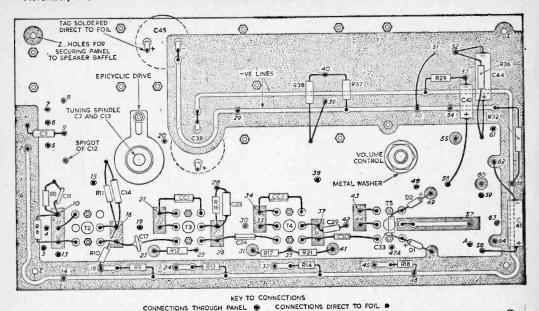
The below-chassis wiring—this diagram should also be used to mark out the printed wiring before etching; the copper which remains after etching is shown unshaded.
